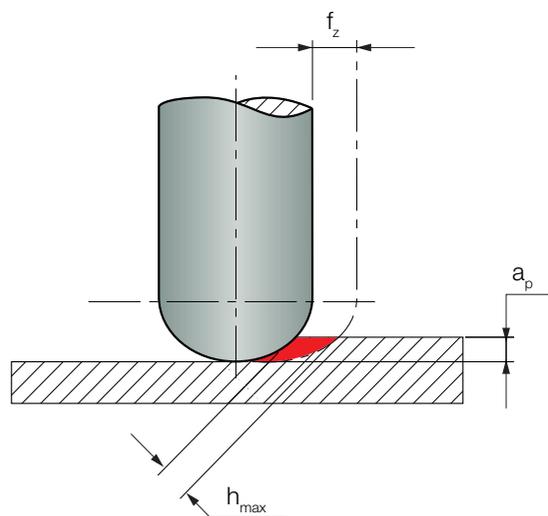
Axial chip thinning in milling with a ball nose milling cutter.
